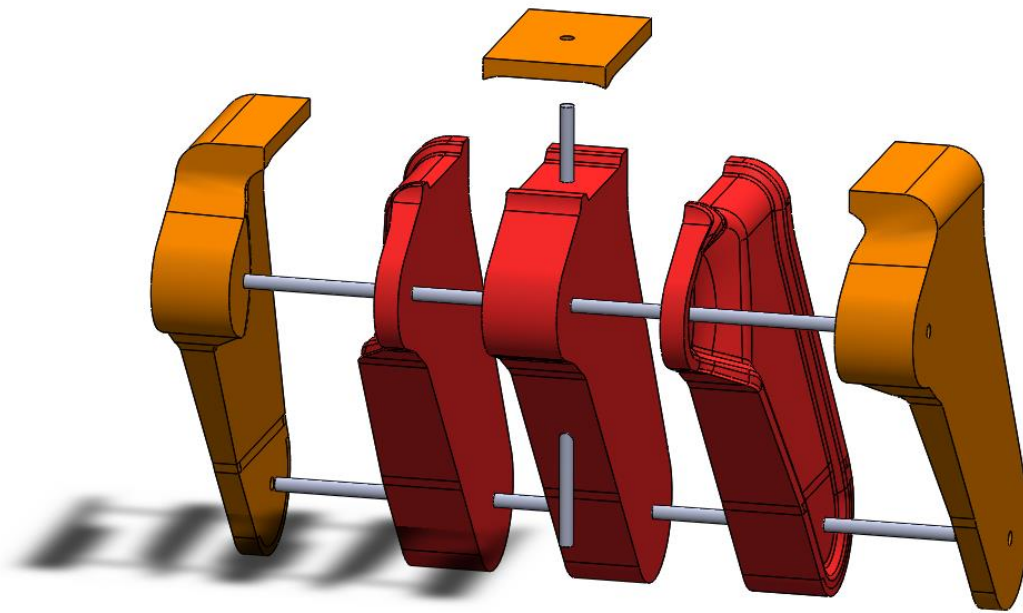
CAD model of complex mold for production prototypes. CAD model was prepared for 3D printing rapid prototyping
